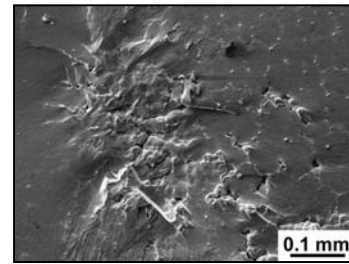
Large casting defect in material from batch 2 in the site of crack initiation
